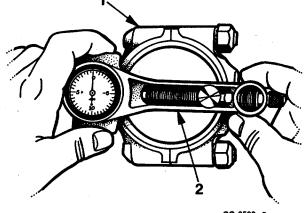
Connecting Rod Bearing Bore Taper Measurement
